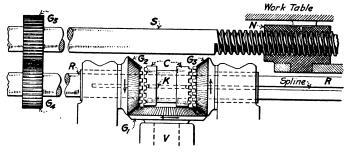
A.—Illustrates principle of bevel gear reversing mechanism as applied to milling machine table feed. (Brown & Sharpe.)
